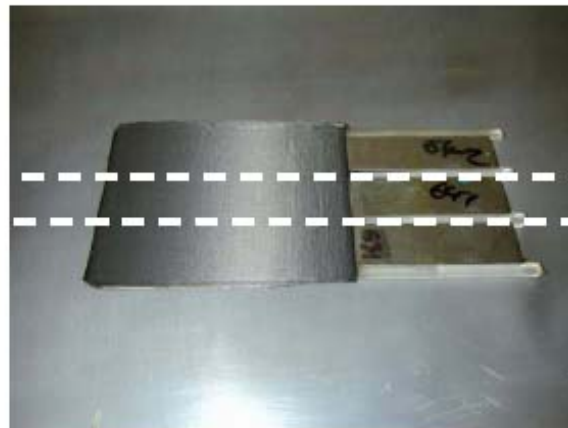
Photograph showing the cured panel prior to cutting into test specimens.
